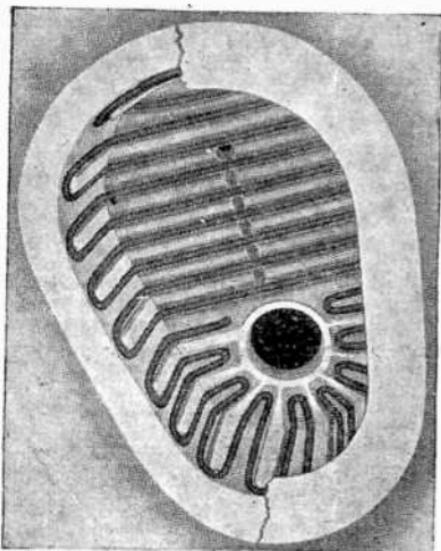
,202.—Electrical heating elements as used on Chapman "Allatonce" commutator soldering machine. Rating of heating elements 1600° to 2200° Fahr. but operated at only about 1200°.
